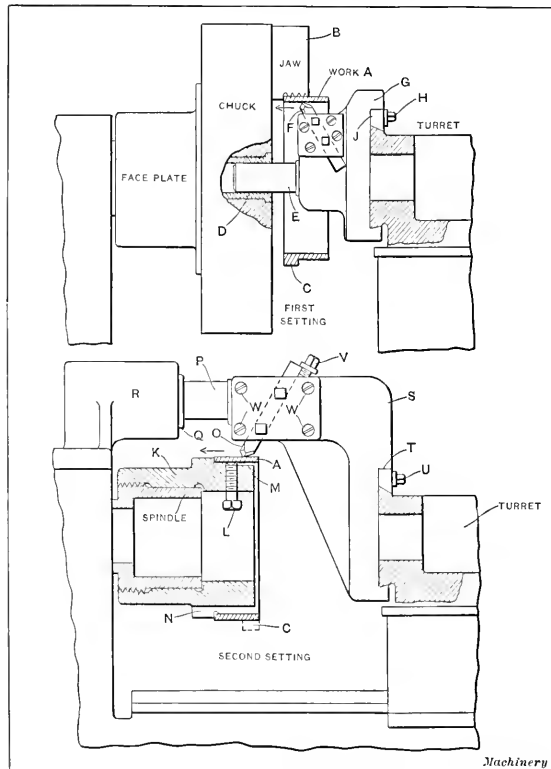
Machining a Thin Steel Casting on a Horizontal Turret Lathe
